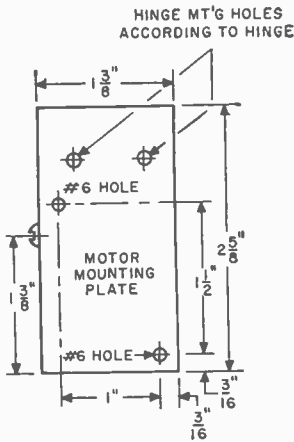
Mount motor to motor mounting plate. Then attach assembly to steering yoke by means of a hinge.
